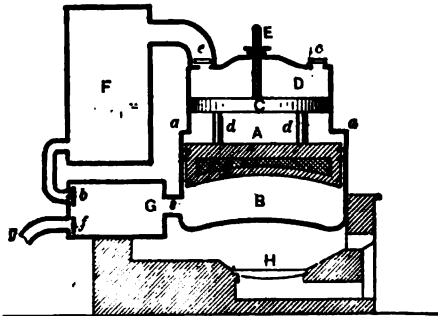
Arts. 269, 270, 275.—Ericsson Engine.
